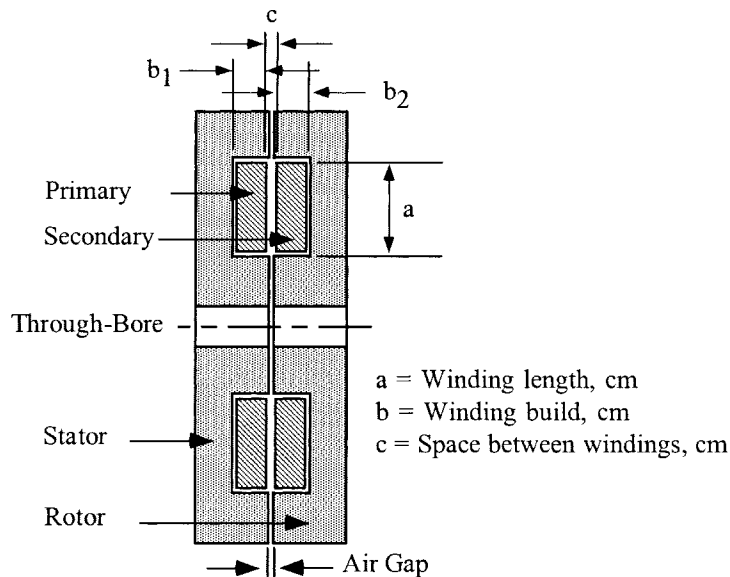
Flat Plane Rotary Transformer, Showing Winding Dimensions.
